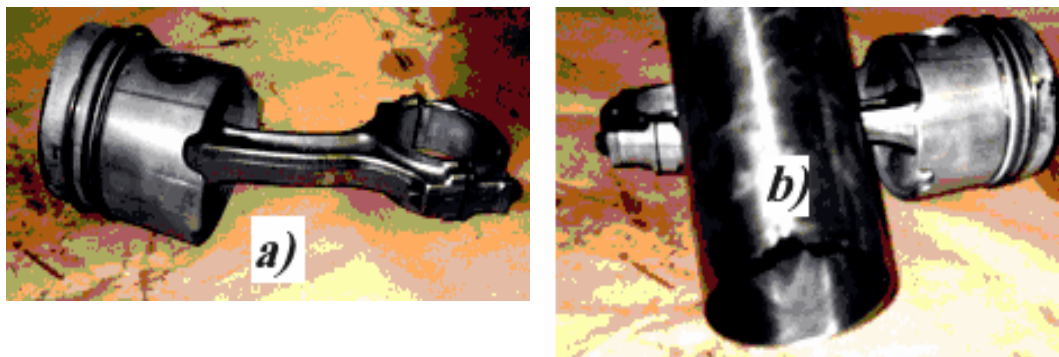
View of damaged: a) connecting rod, b) cylinder sleeve
